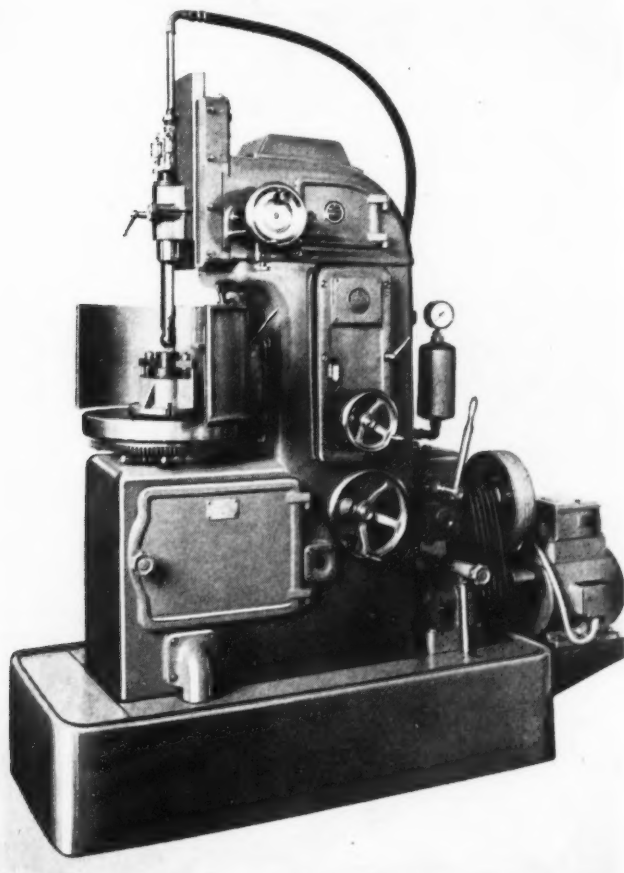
A Swiss Internal Spline Grinding Machine of Unusual Design
